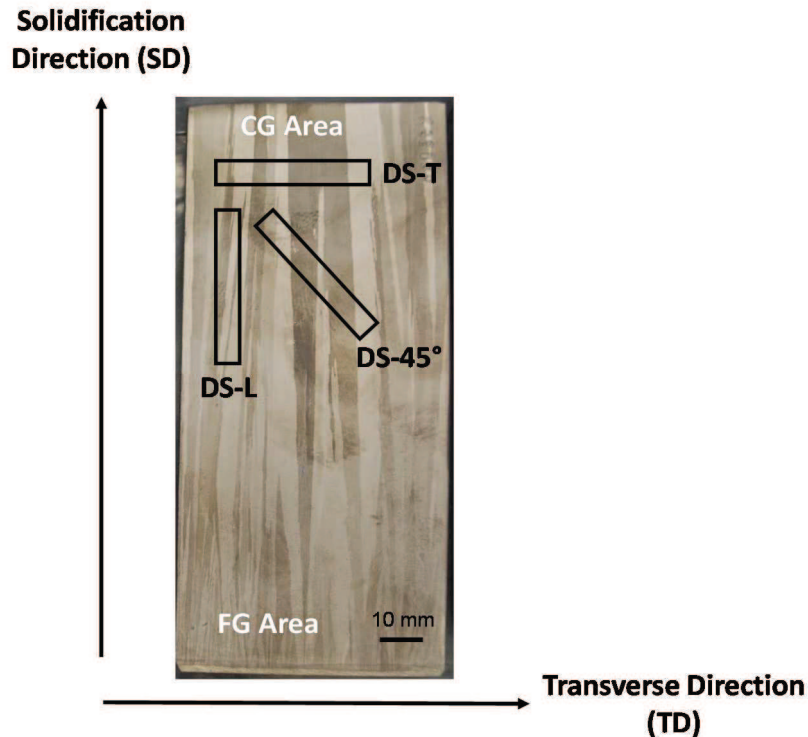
Typical DS200+Hf plate used to machine specimens used in this thesis.
